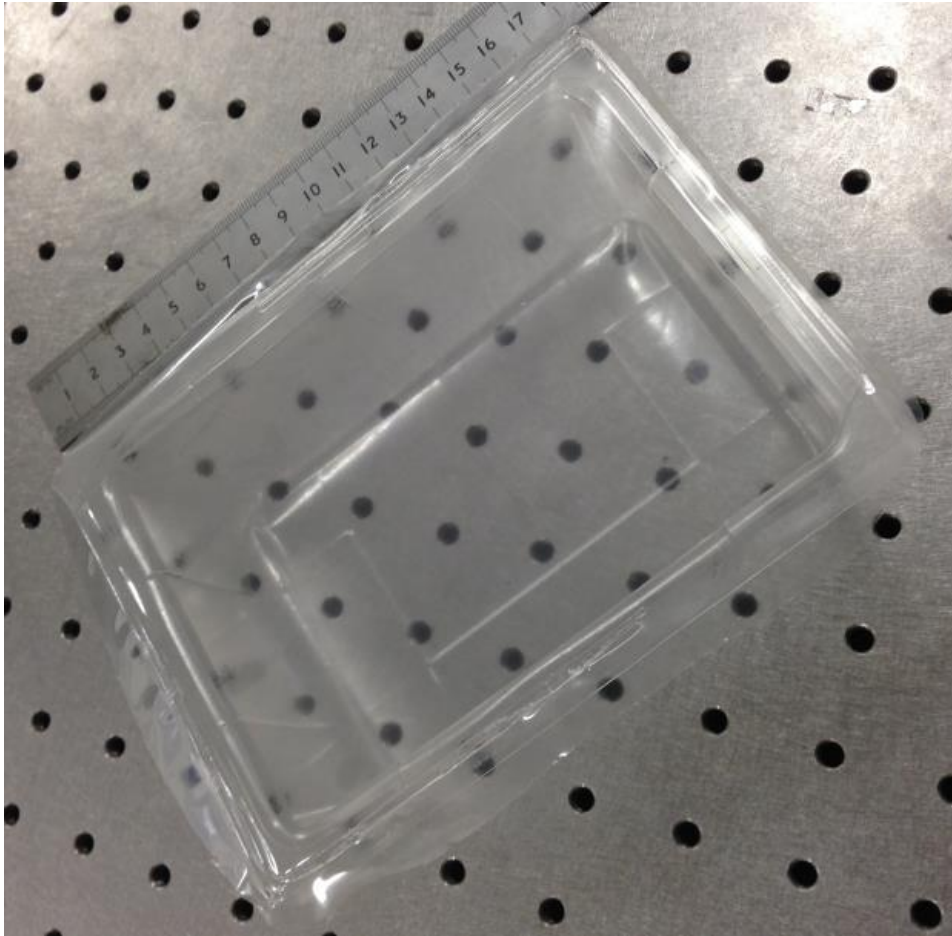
Tray made in the brick mould that is laser welded and cut
